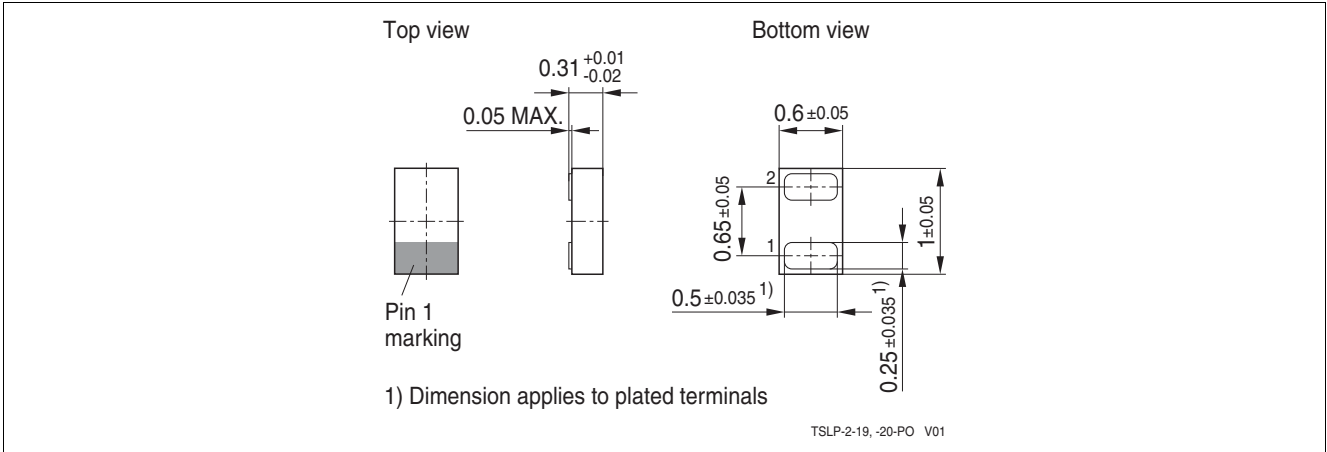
TSLP-2-20 Package outline (dimension in mm)
